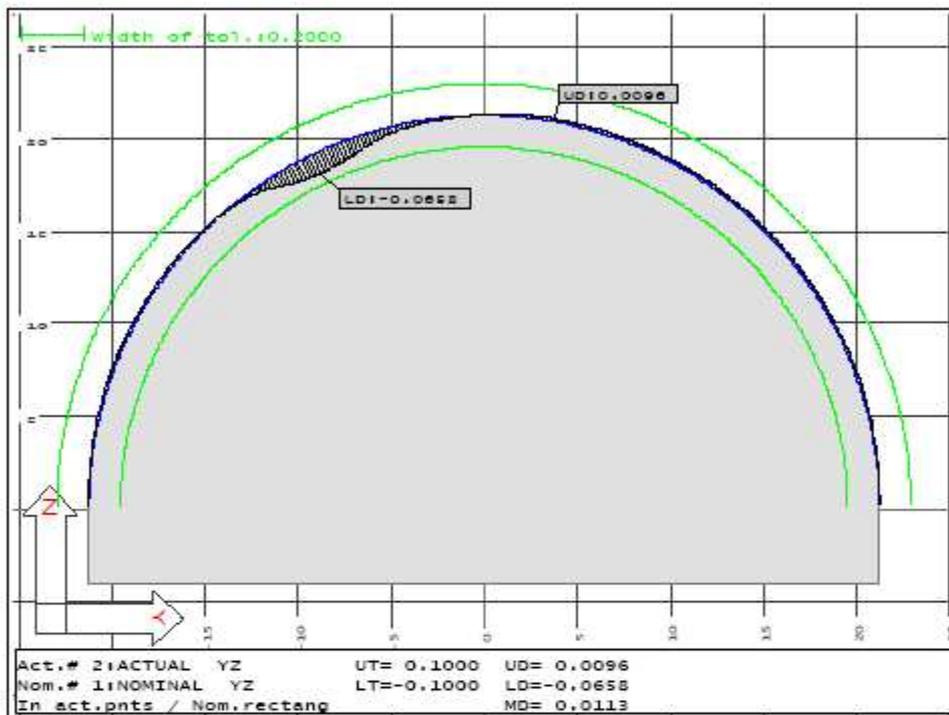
Typical co-ordinate measuring machine trace from the head of an explanted component showing localised wear and a maximum local wear depth of 68µm
